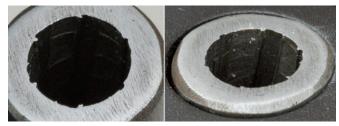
The homemade rifled barrel assembled on Zoraki 917-T blank pistol
